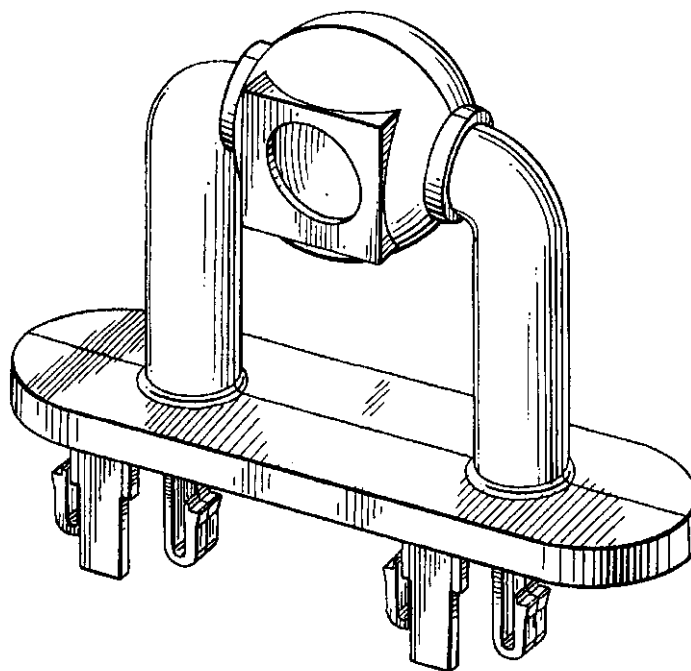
is a perspective view of the lamp support for emergency light fixture;
